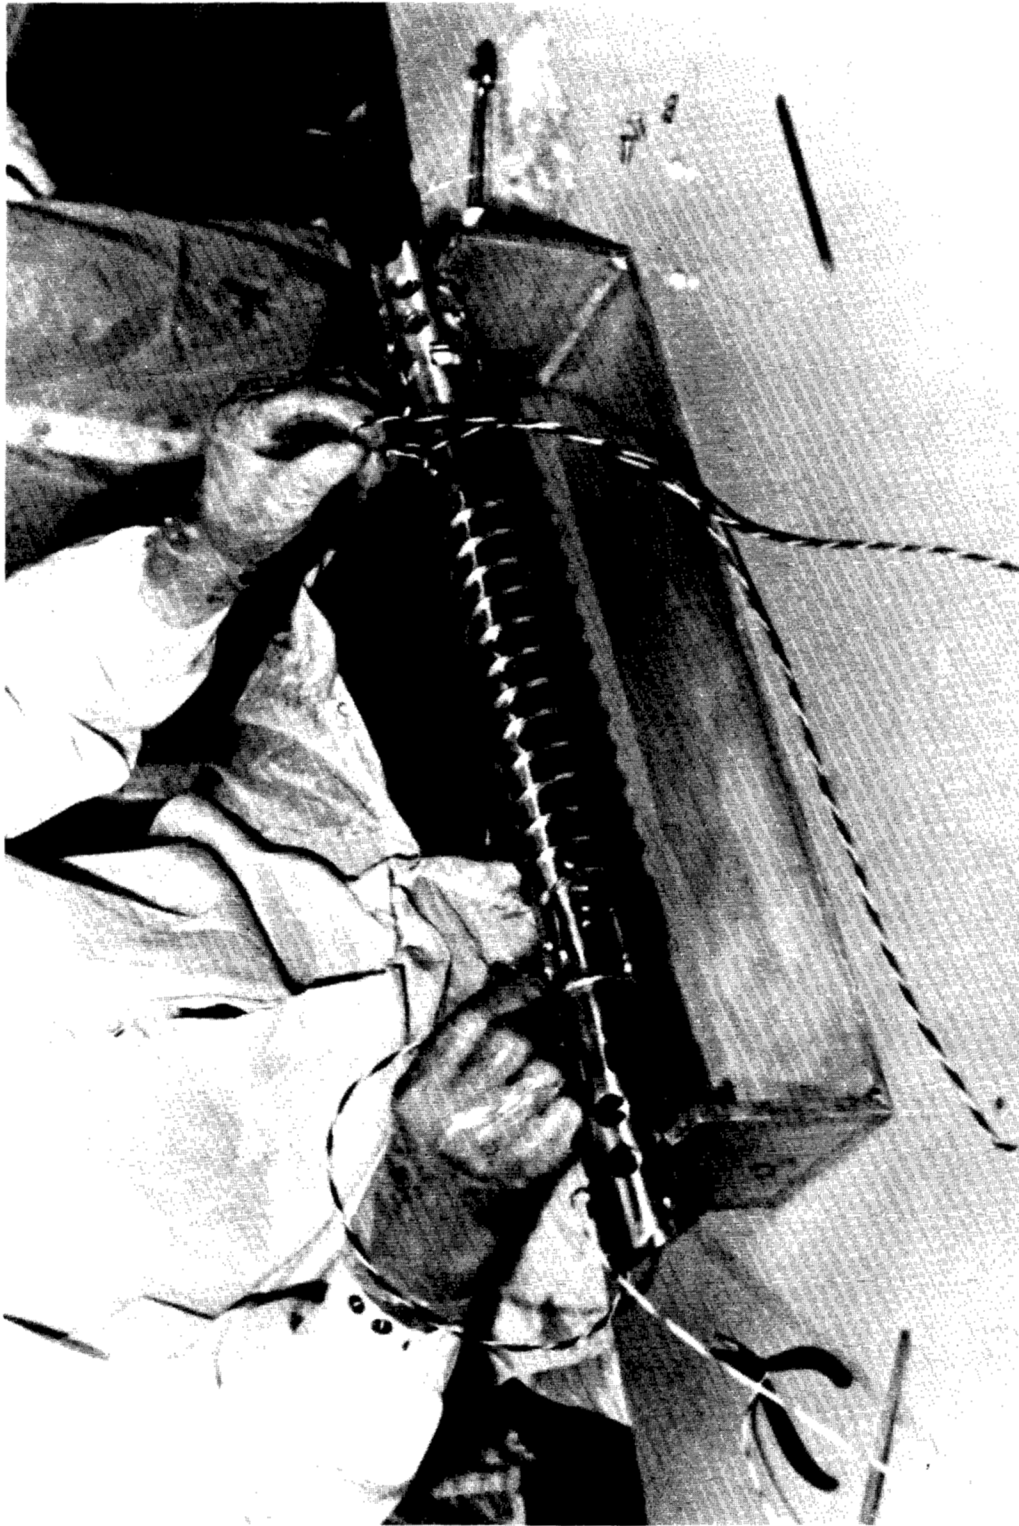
Installing lower motor lead wires in heater conduit.
